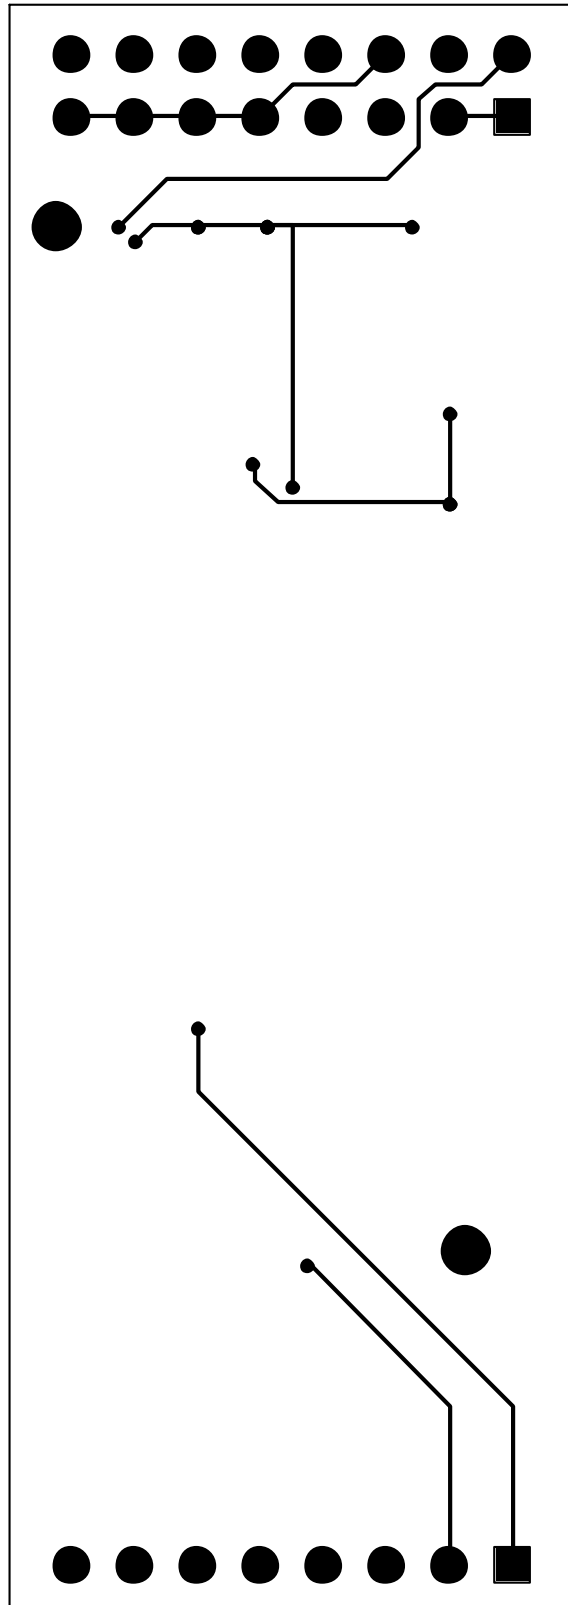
U_p Port Line Interface Subassembly board (bottom side traces)
